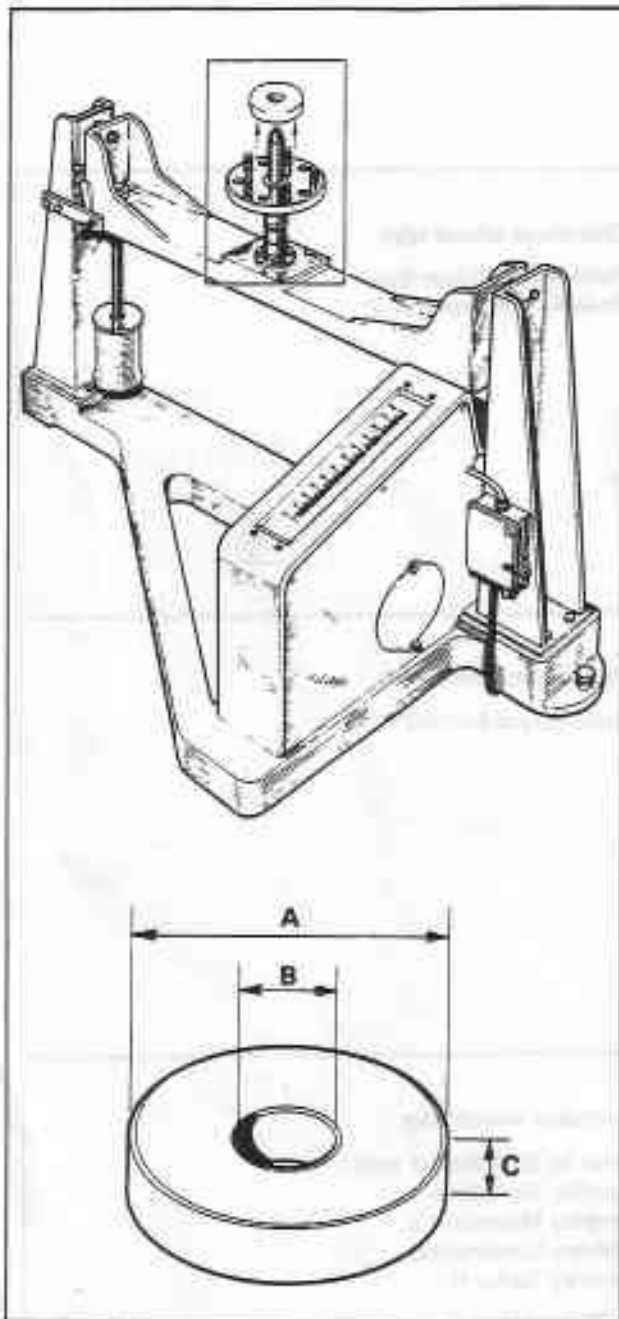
Horizontal type of balancing machine with adapter for spigotted wheels
